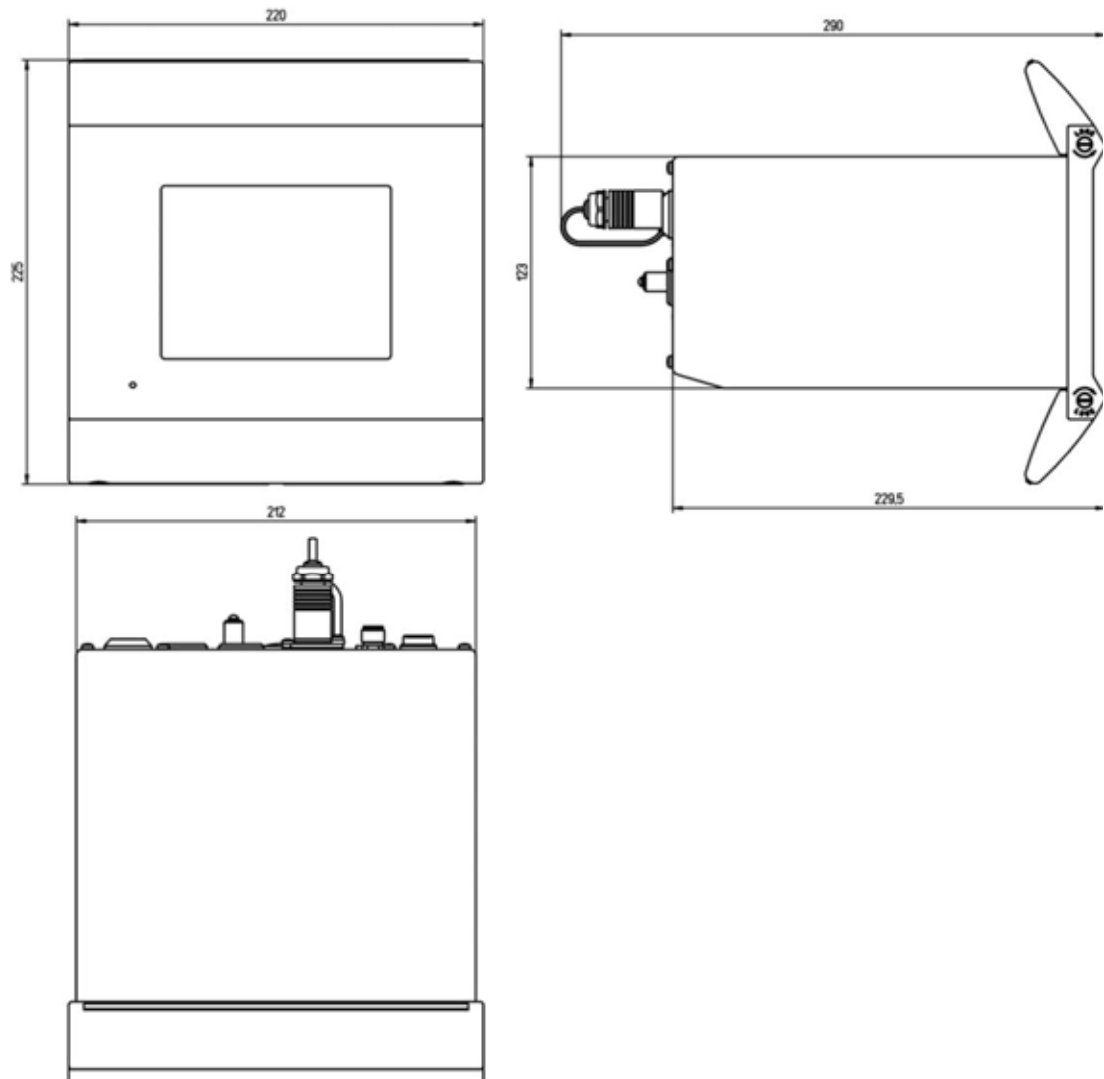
Portable Instrument Dimensions (in millimeters)
